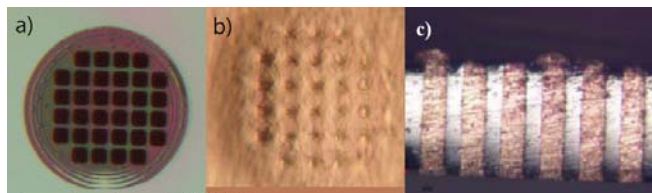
a) Mesh patterned on the suspended SiO₂ layer. b) "Pinched off" Cu seed layer. c) TSV cross-section showing void-free via filling.
